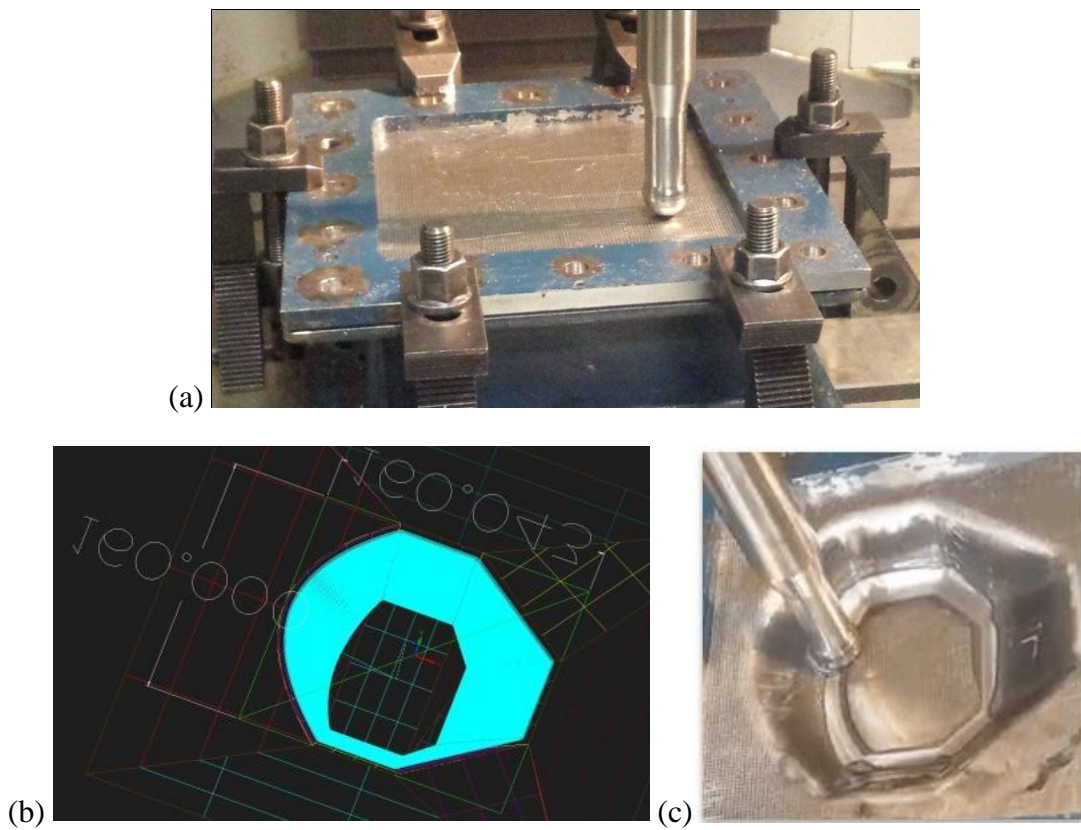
ISF process for Multi-slope geometry; (a) Start, (b) Tool path generated in Alphacam, (c) Tool forming the sheet metal.
